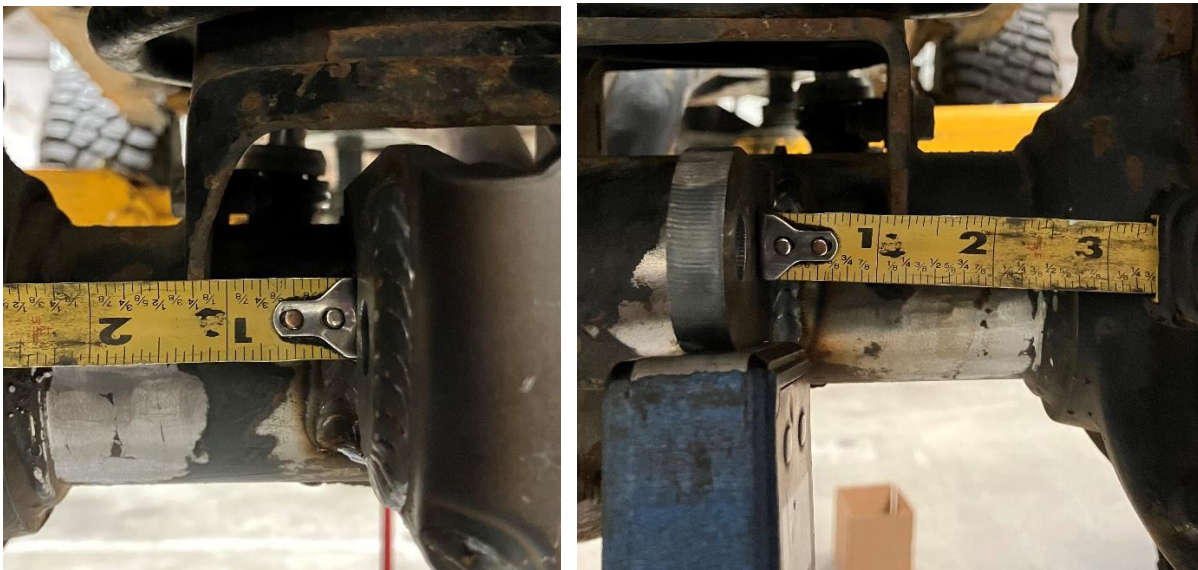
and 16. Completed Vertical Welds on Either Side of the Track Bar Bracket.
